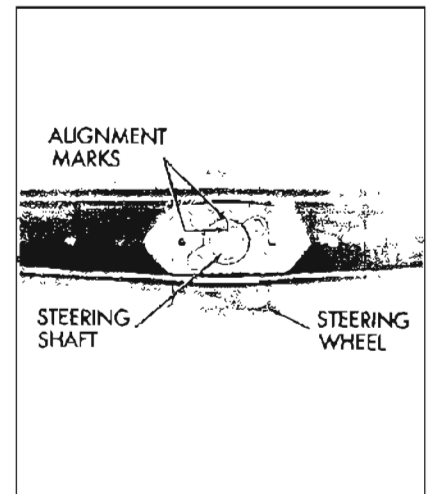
Steering Wheel and Shaft Alignment Marks
